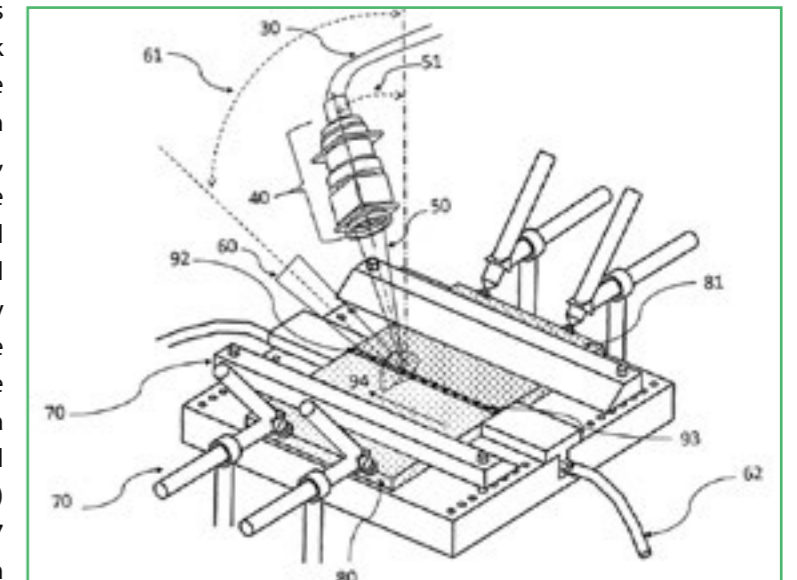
A diode-laser based setup for thick-section welding
